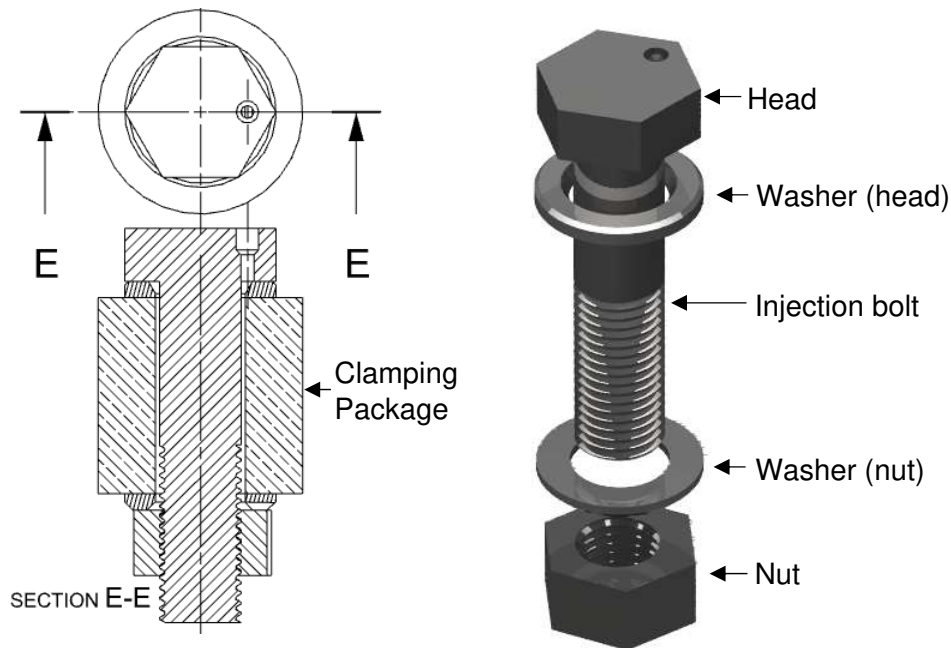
Left: cross section of an assembly with an injection bolt. Right: exploded view indicating differing components within the assembly.
